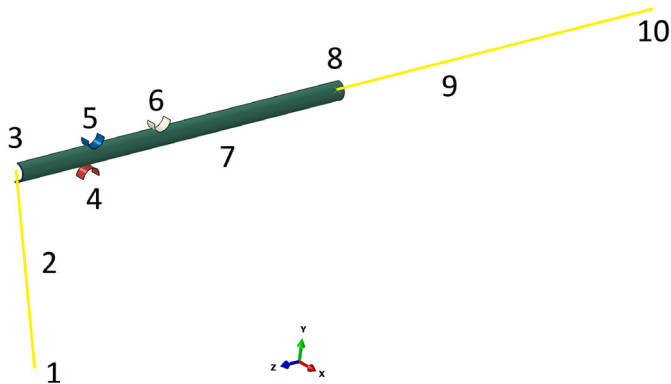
The applied boundary conditions for the tube bending process 1 – rotation point (hinge element), 2 – bending arm (connector element), 3 – MPC with hinge element, 4, 5, 6 – horizontal rollers (discrete rigid body), 7 – tube, 8 – MPC with hinge element, 9 – actuator (connector element with a prescribed displacement), 10 – fixed point with hinge element
